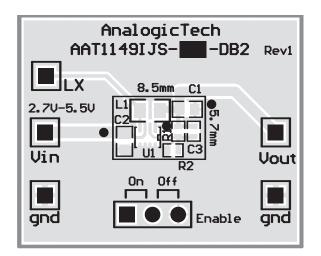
Minimum Footprint Evaluation Board Using 2.0x1.25x1.0mm Inductor.
